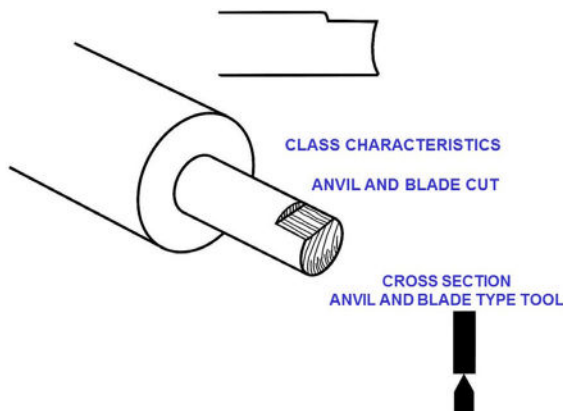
B: Toolmark impression profiles produced on wire end by a shear cutter. Anvil impression on side of wire with cut impression on the end of the wire. Note that the anvil size could be a significant characterizing feature
